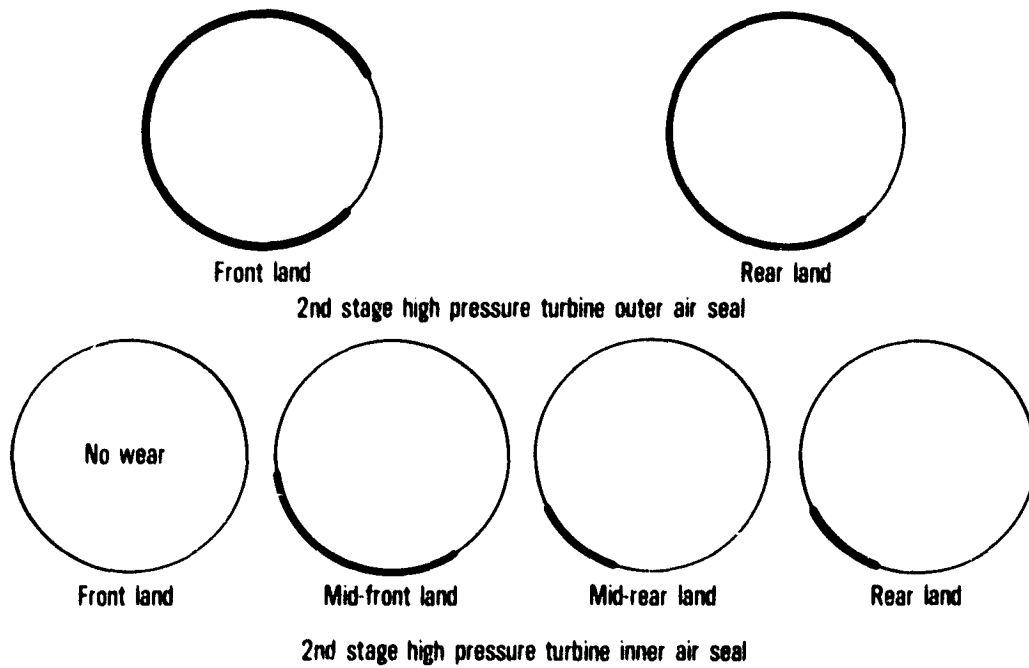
Teardown Wear Patterns (Rear View); Second-Stage High-Pressure Turbine Outer and Inner Air Seals. (J23976-17)
